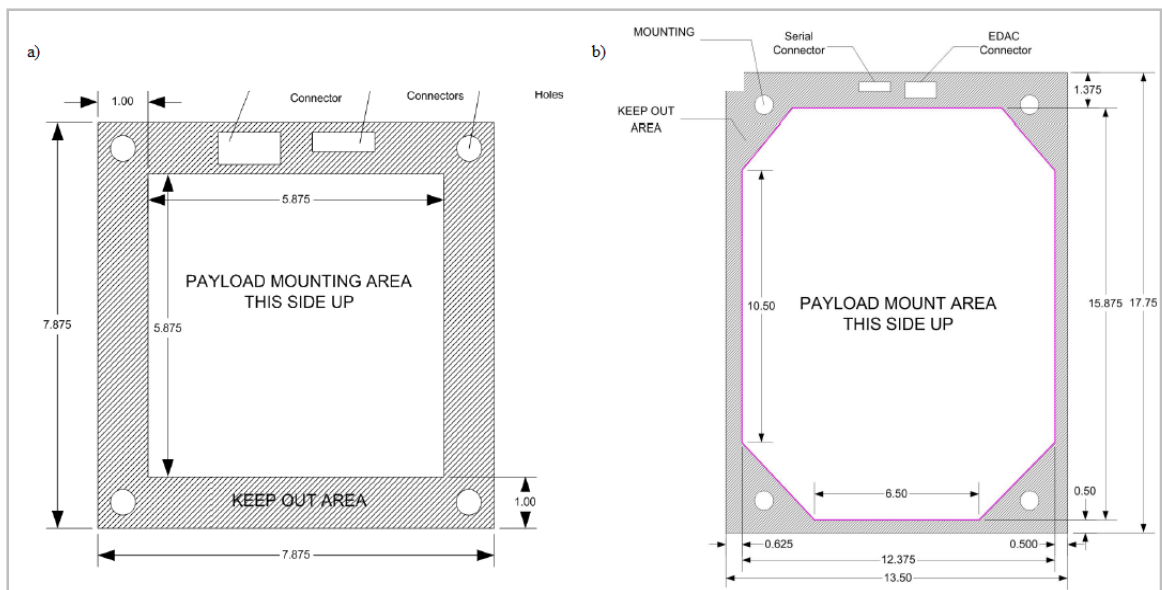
a) Small Payload Mounting Plate, dimensioned in inches, that UND utilized, and b) Large Payload Mounting Plate, dimensioned in inches (Guzik *et al.* 2006)
